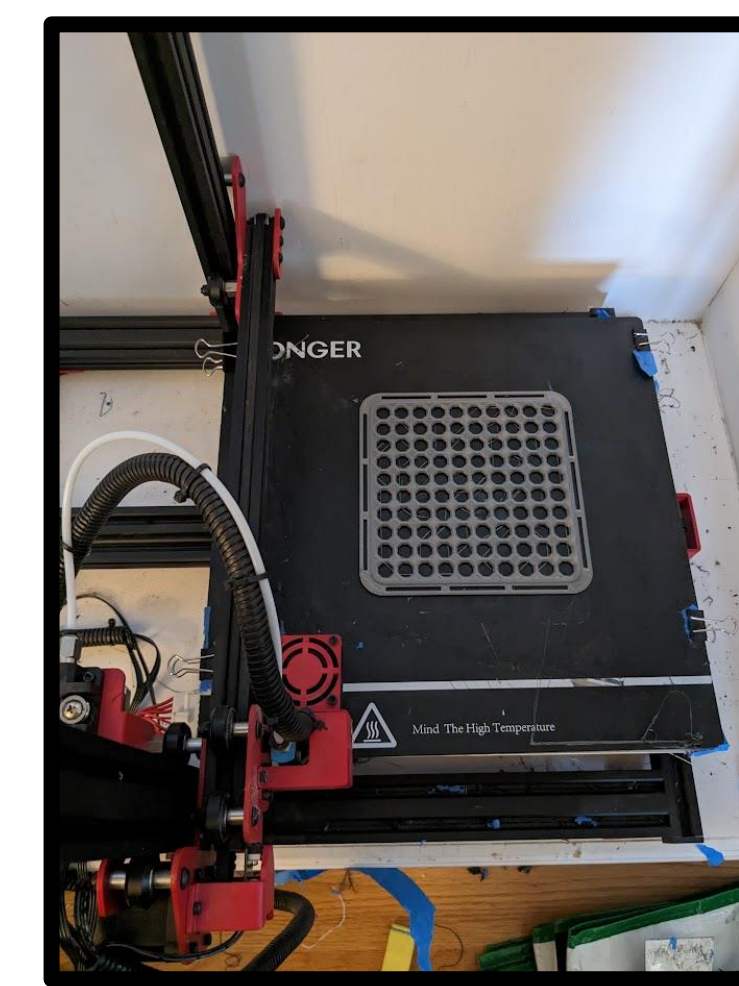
Mk4 design on 3D-printer bed upon print completion.
